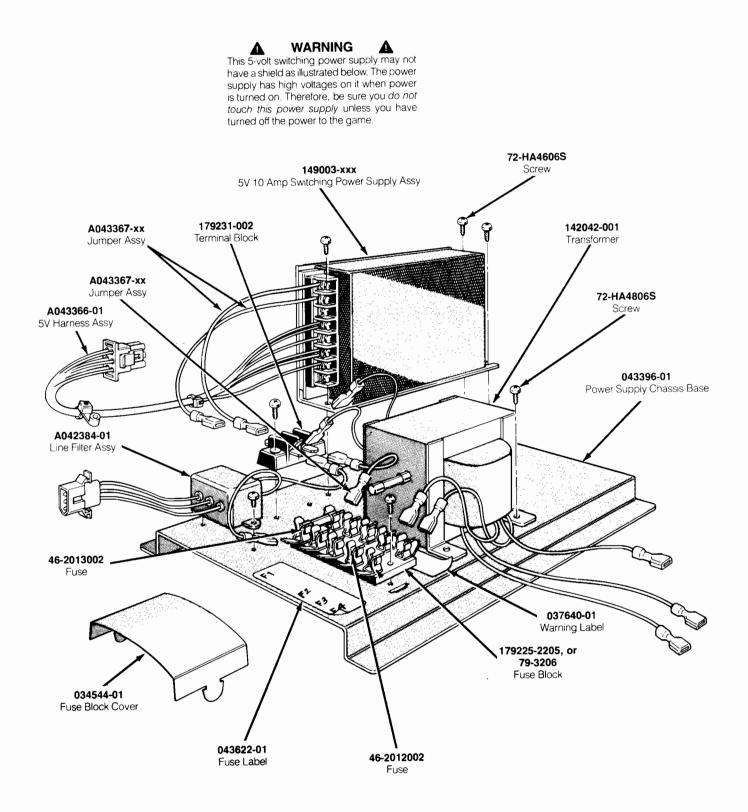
Switching/Linear (SL) Power Supply Assembly A043787-01 A
